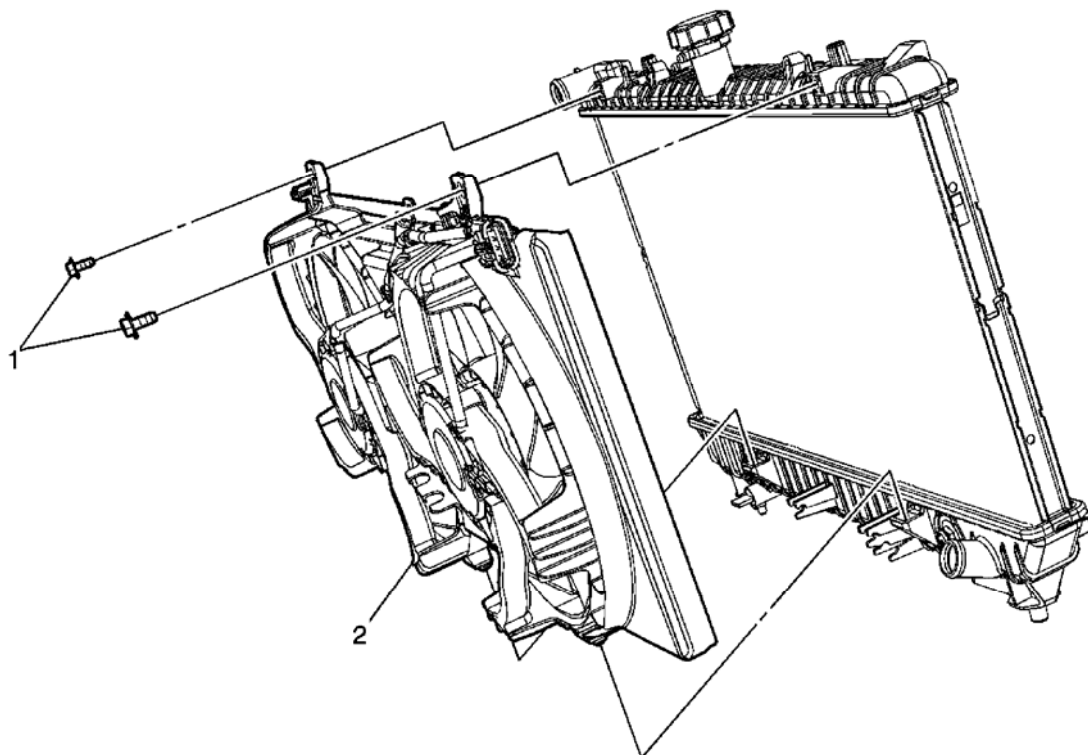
Engine Coolant Fan Shroud (LS3, L99)
